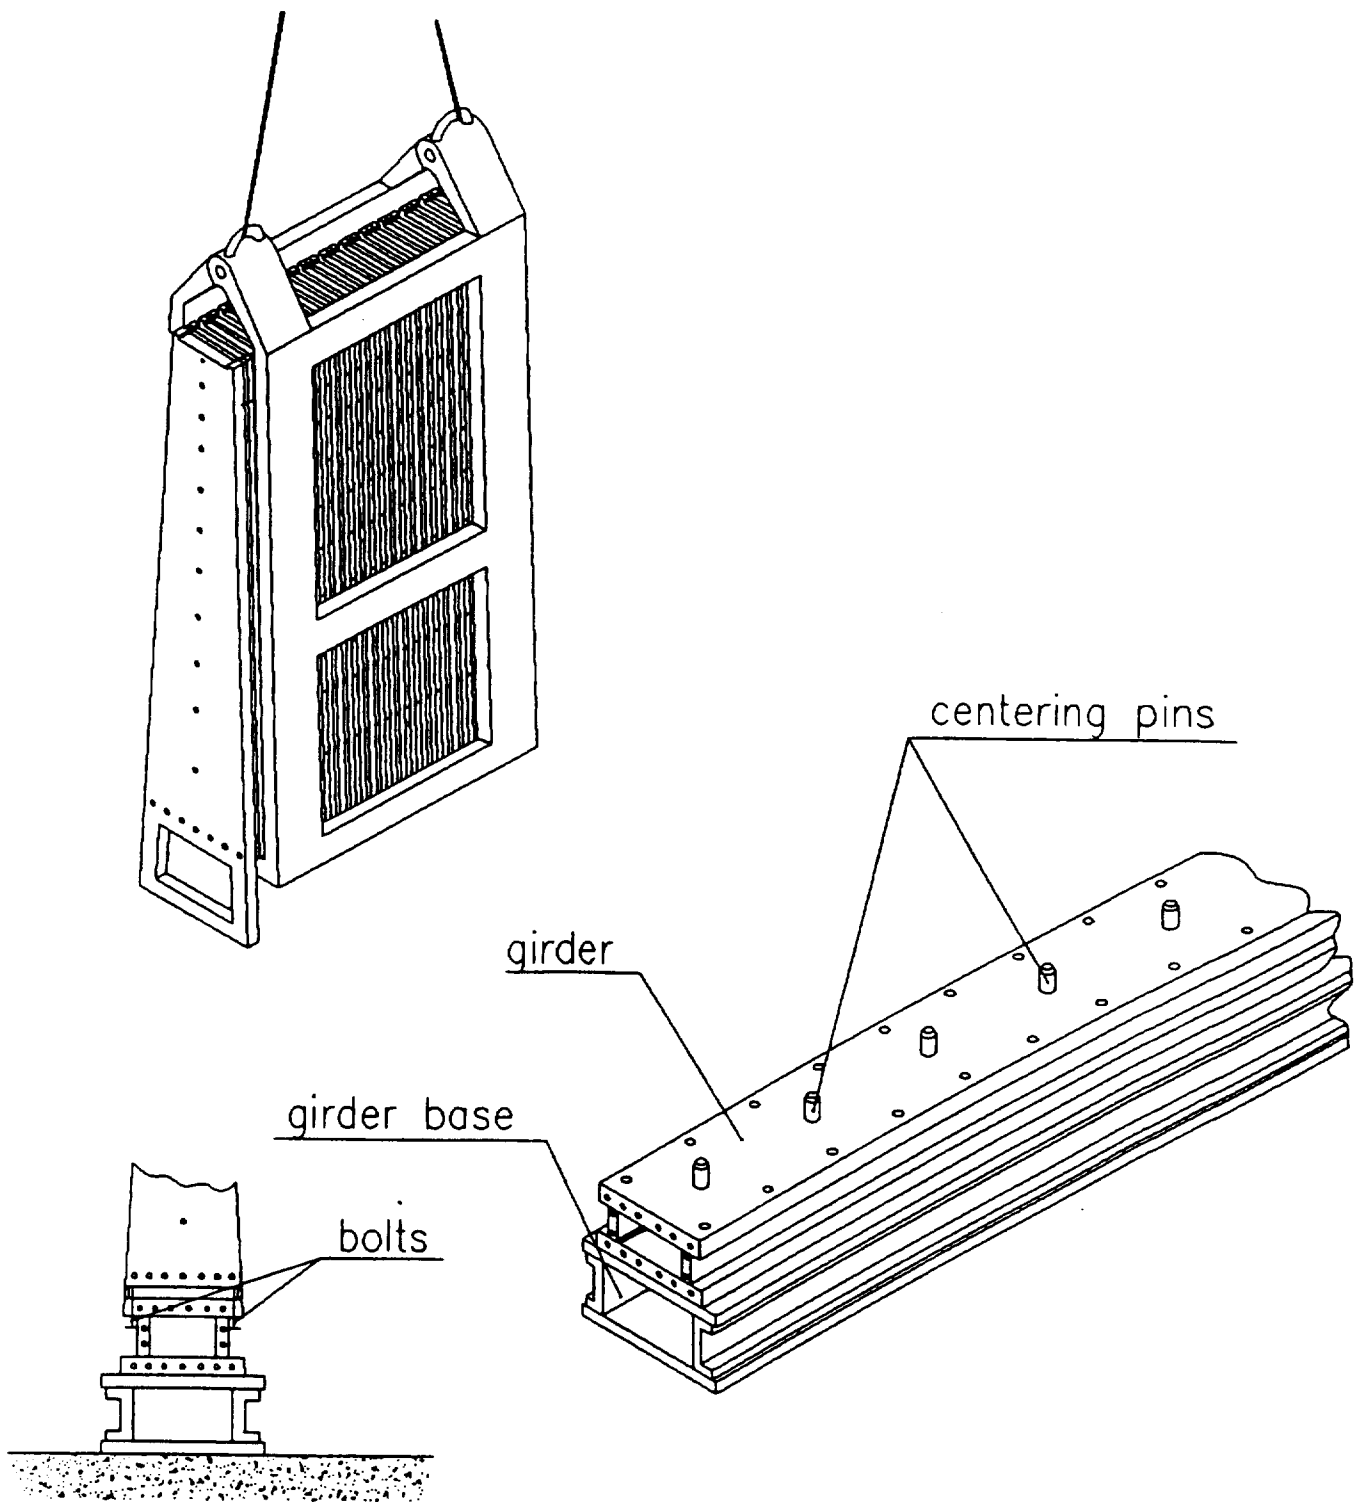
Assembly of girder, mounting of modules on girder, prefastening of modules to girder.
